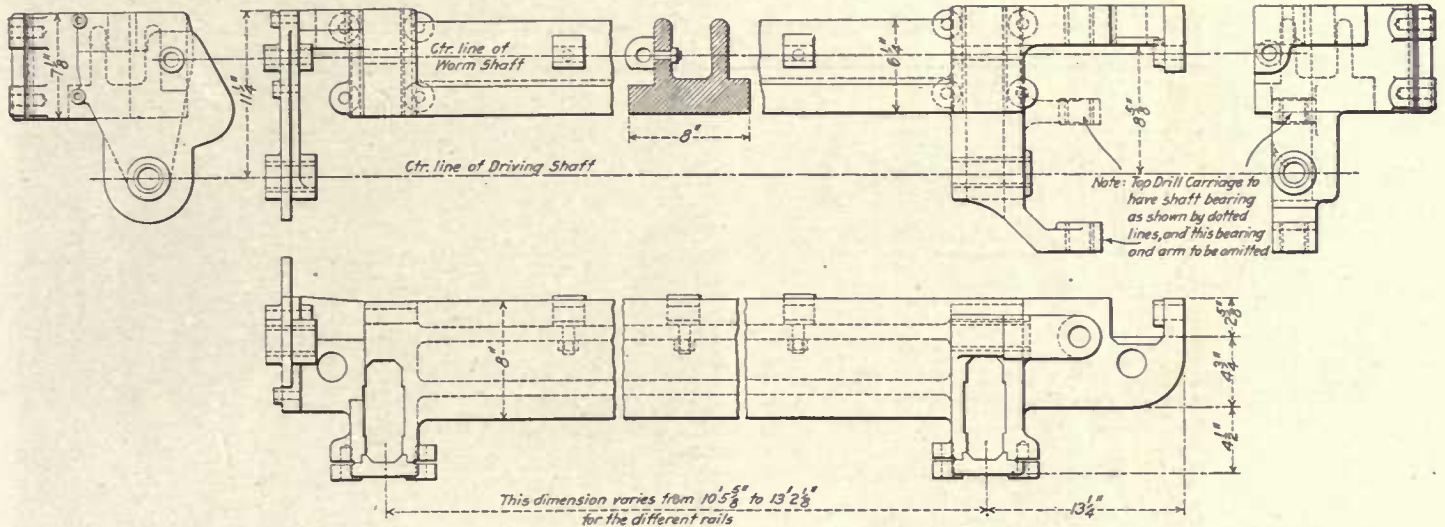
Drill-Head and Carriage Details of Multiple Staybolt Drill.
